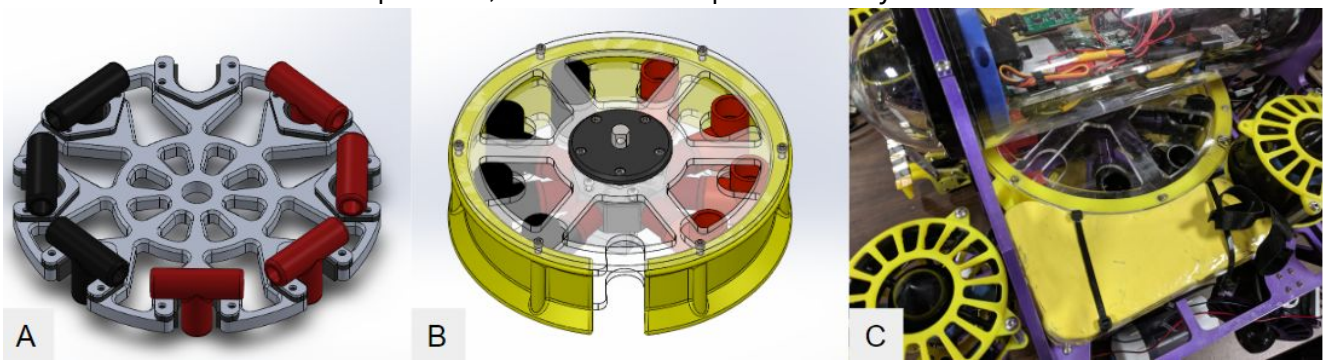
T-dropper initial CAD concept (A), final CAD, and final assembly within the ROV frame (C).
